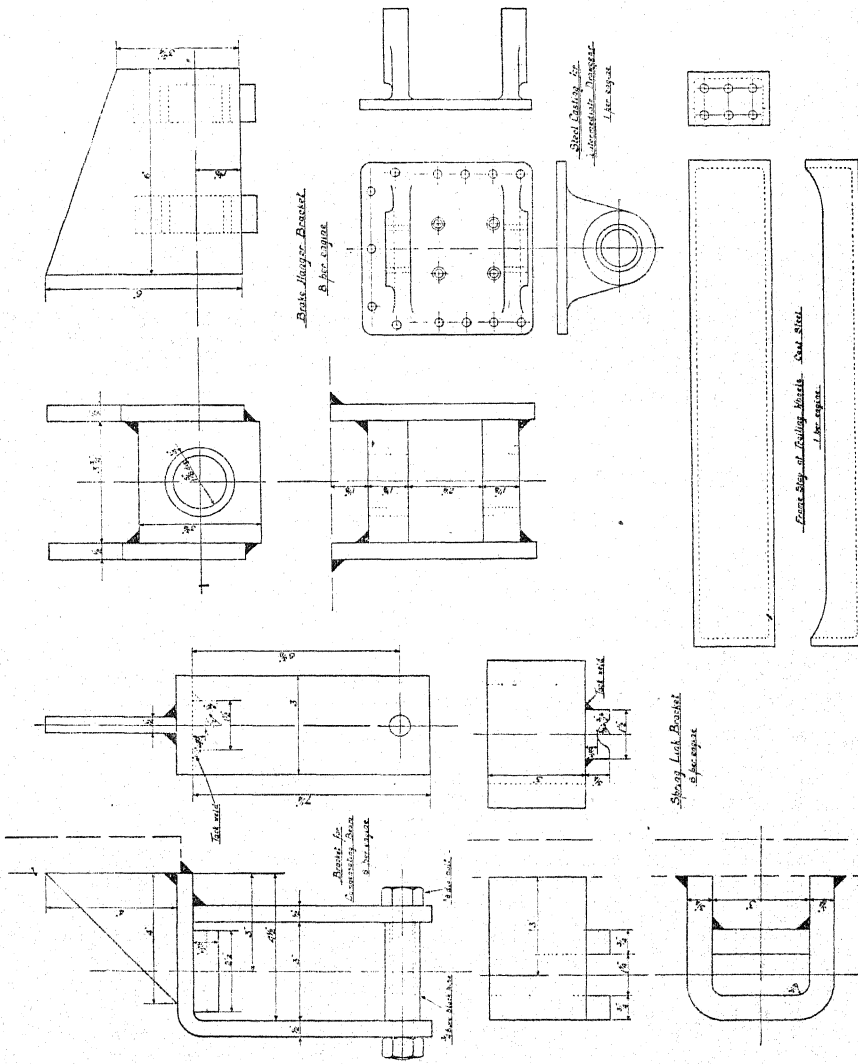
Spring compensating beam brackets and spring link brackets for arc welded construction; also steel castings for intermediate drawgear and frame stay in rivetted construction.
